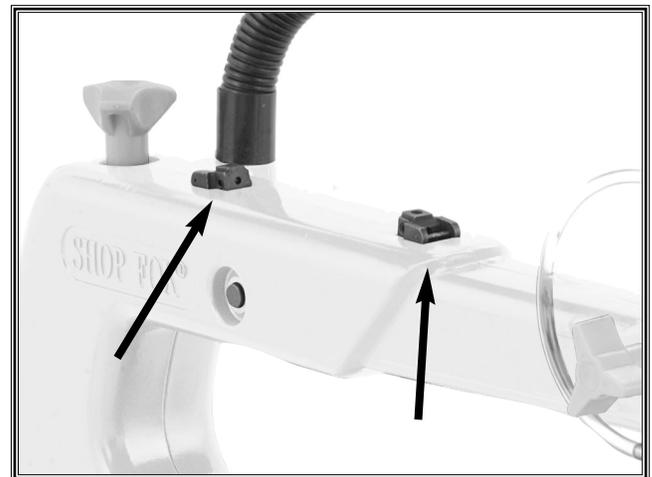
Blade adapters in the gauge on top of the scroll saw.
